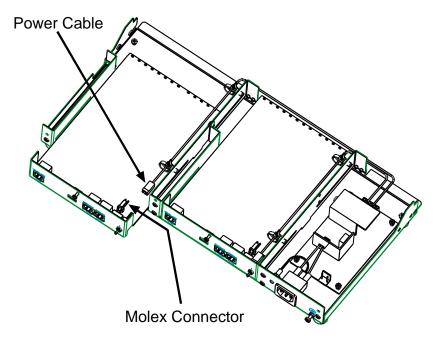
MVP2410/3010 Chassis (top/rear view)
